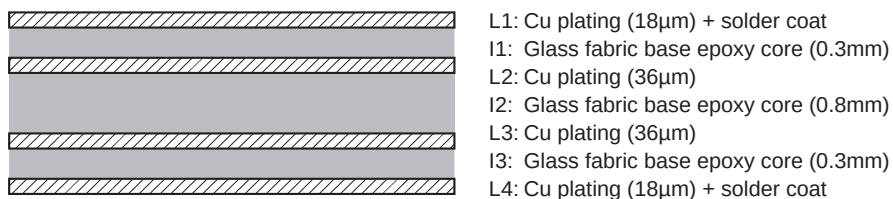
Recommended Printed Circuit Board Pattern Structure
